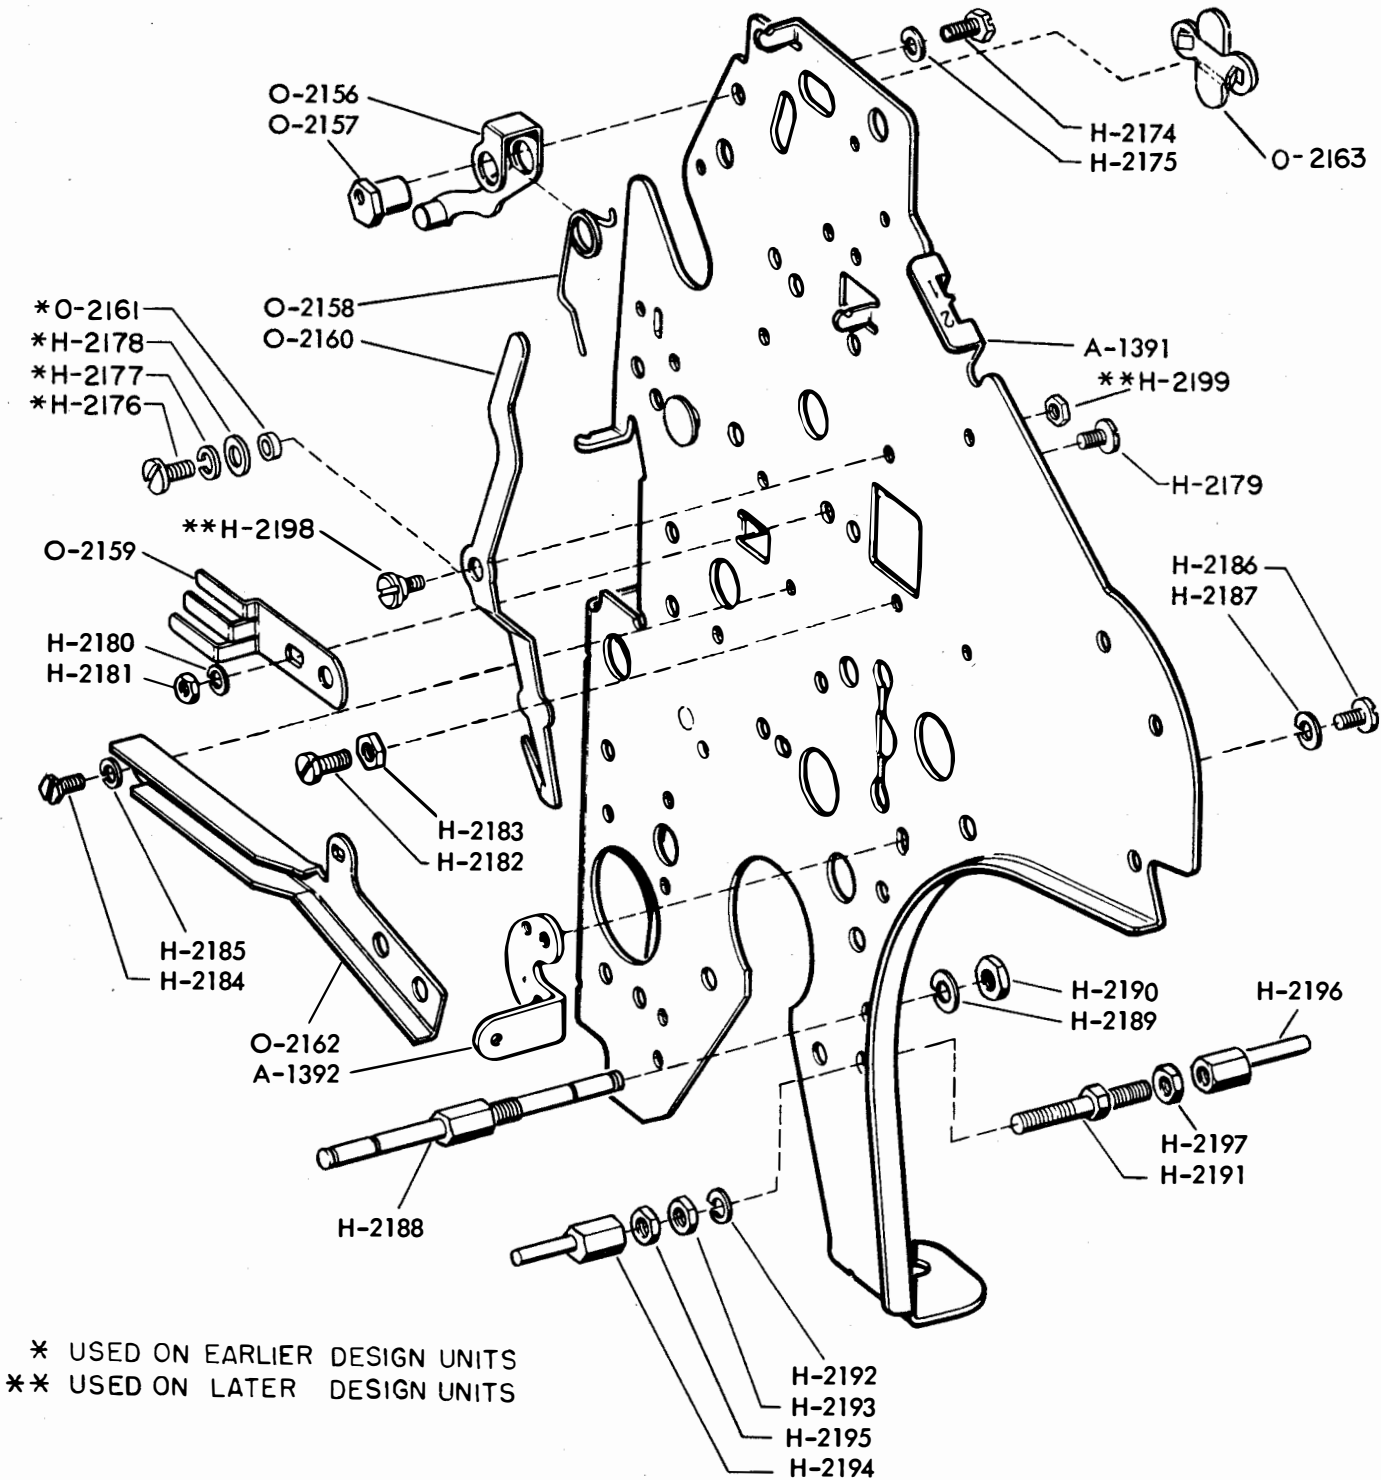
Automatic Typewriter, Left Side Frame Mechanism
